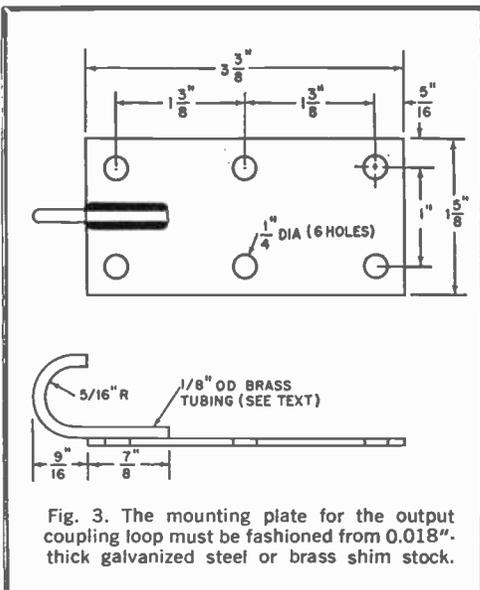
The mounting plate for the output coupling loop must be fashioned from 0.018"-thick galvanized steel or brass shim stock.
